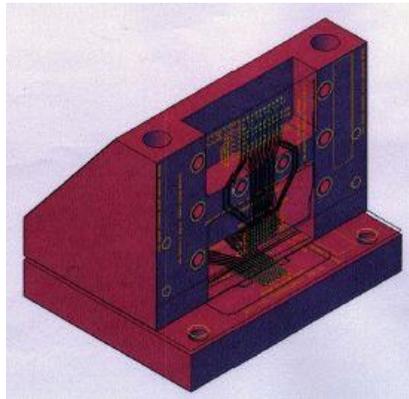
Vibration and Mechanical Shock Mounting Fixture
